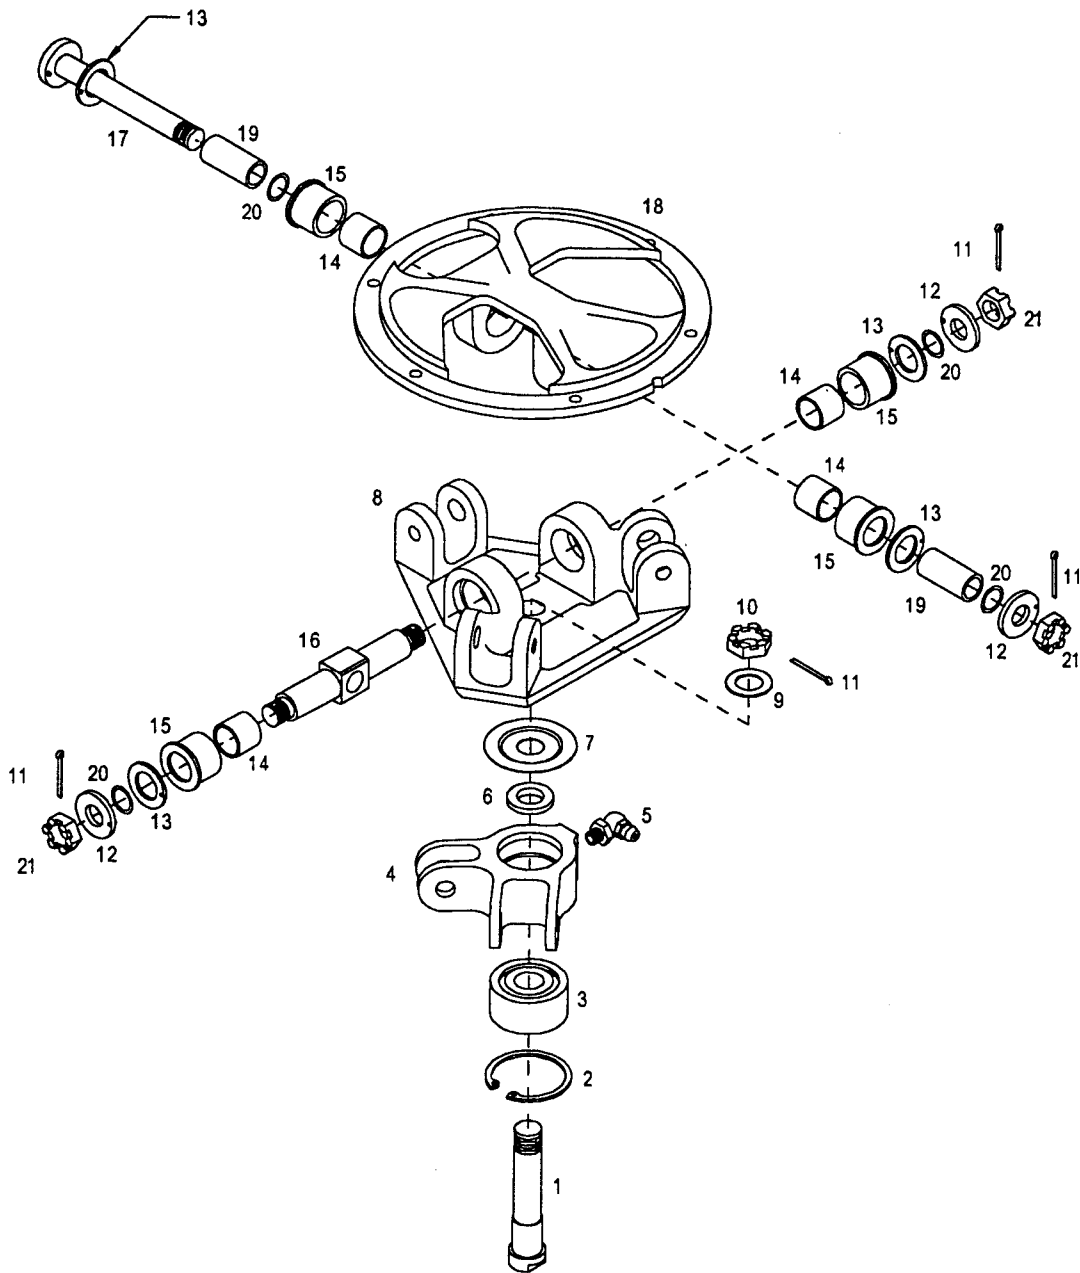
LOWER SWASHPLATE ASSEMBLY
